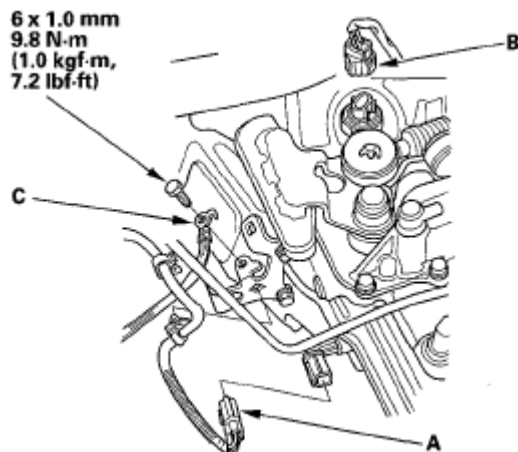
Identifying Output Shaft Speed Sensor Connector And Back-Up Light Switch Connector With Torque Specification
